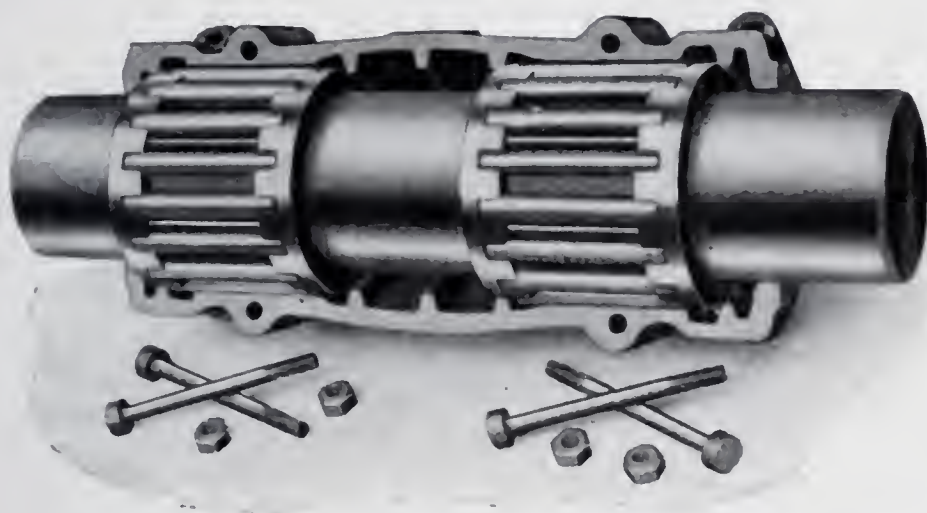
ROLLER BEARING SHAFTING HANGERS.
